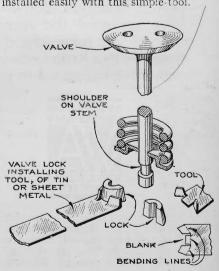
A valve lock installing tool that is easy to make and will save much wear and tear.
